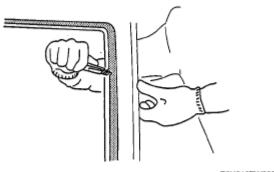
Identifying Hollowed Mark With Sections For Applying Primer Courtesy of MAZDA MOTORS CORP.
